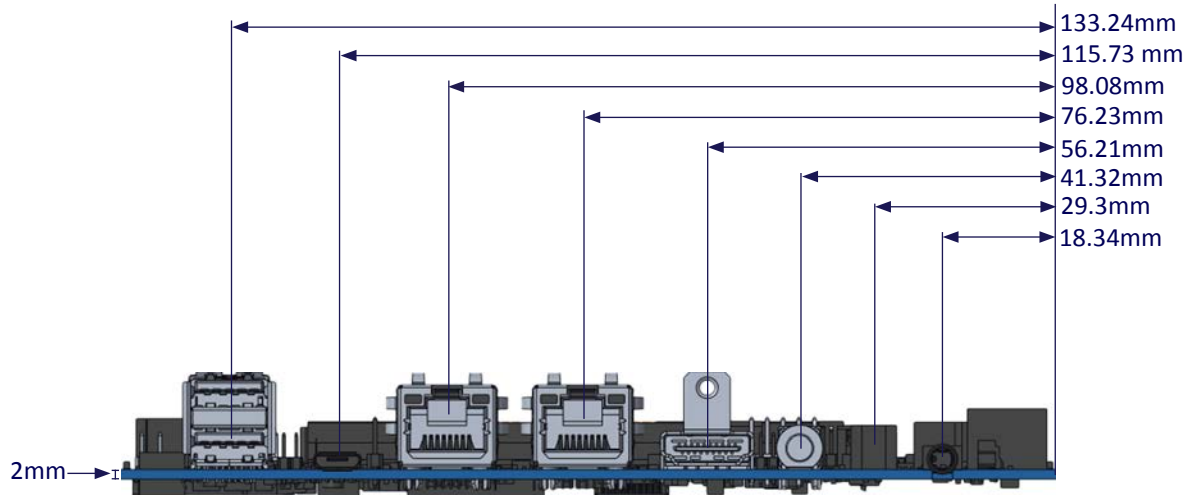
External I/O dimensions of the VIA SOMDB7 carrier board (back coastline I/O)
